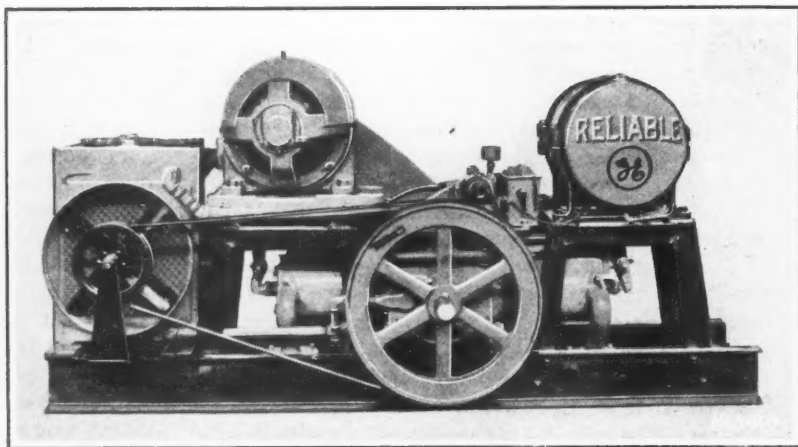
Portable Medium-duty Arc Welding Equipment made by the General Electric Co.
